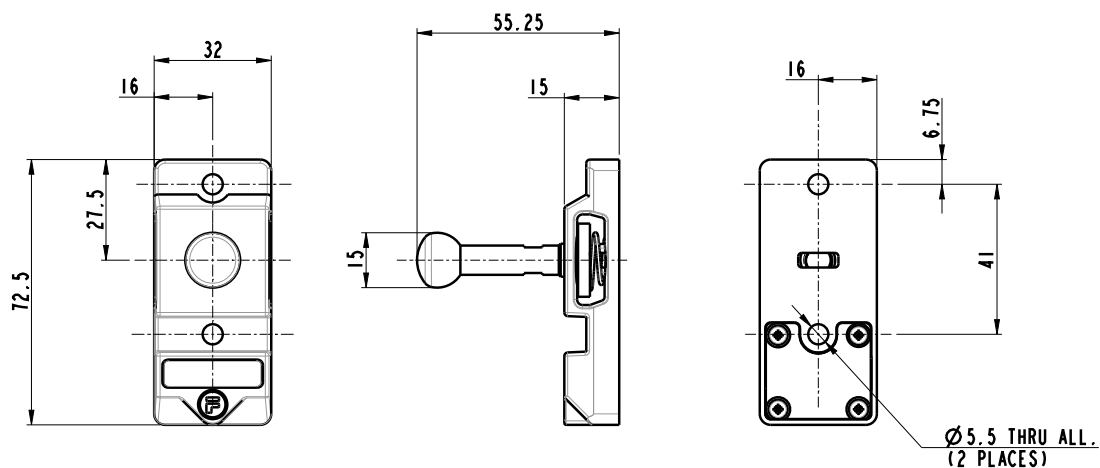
Dimensional Drawing - ATOM Interlocking Device
